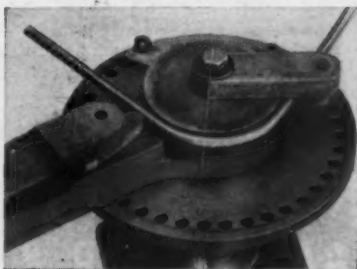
Conversion to work on forming solid rod, using different nose and mandrel than in Fig. 6.
